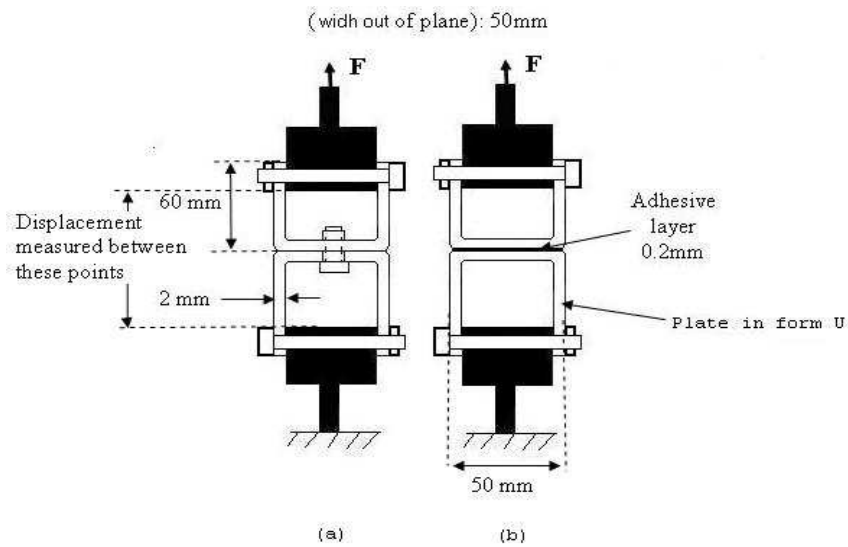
Experimental arrangement for the joint tests in traction (a): screwed or riveted joint, (b): bonded joint
